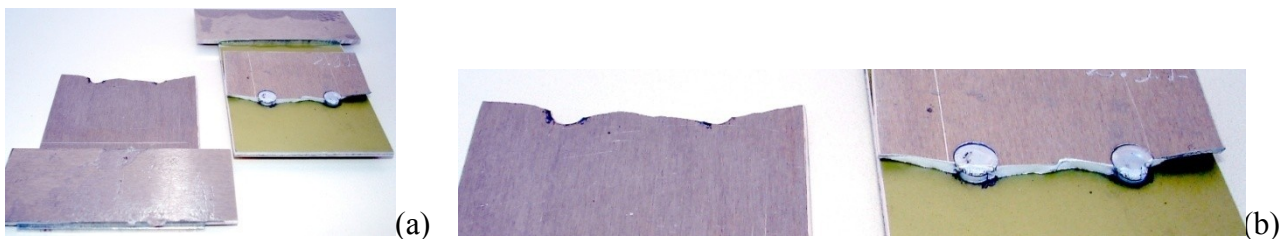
(a) Fatigue fracture of Al-Gl joint without previous conditioning [4]; (b) Magnified view.
